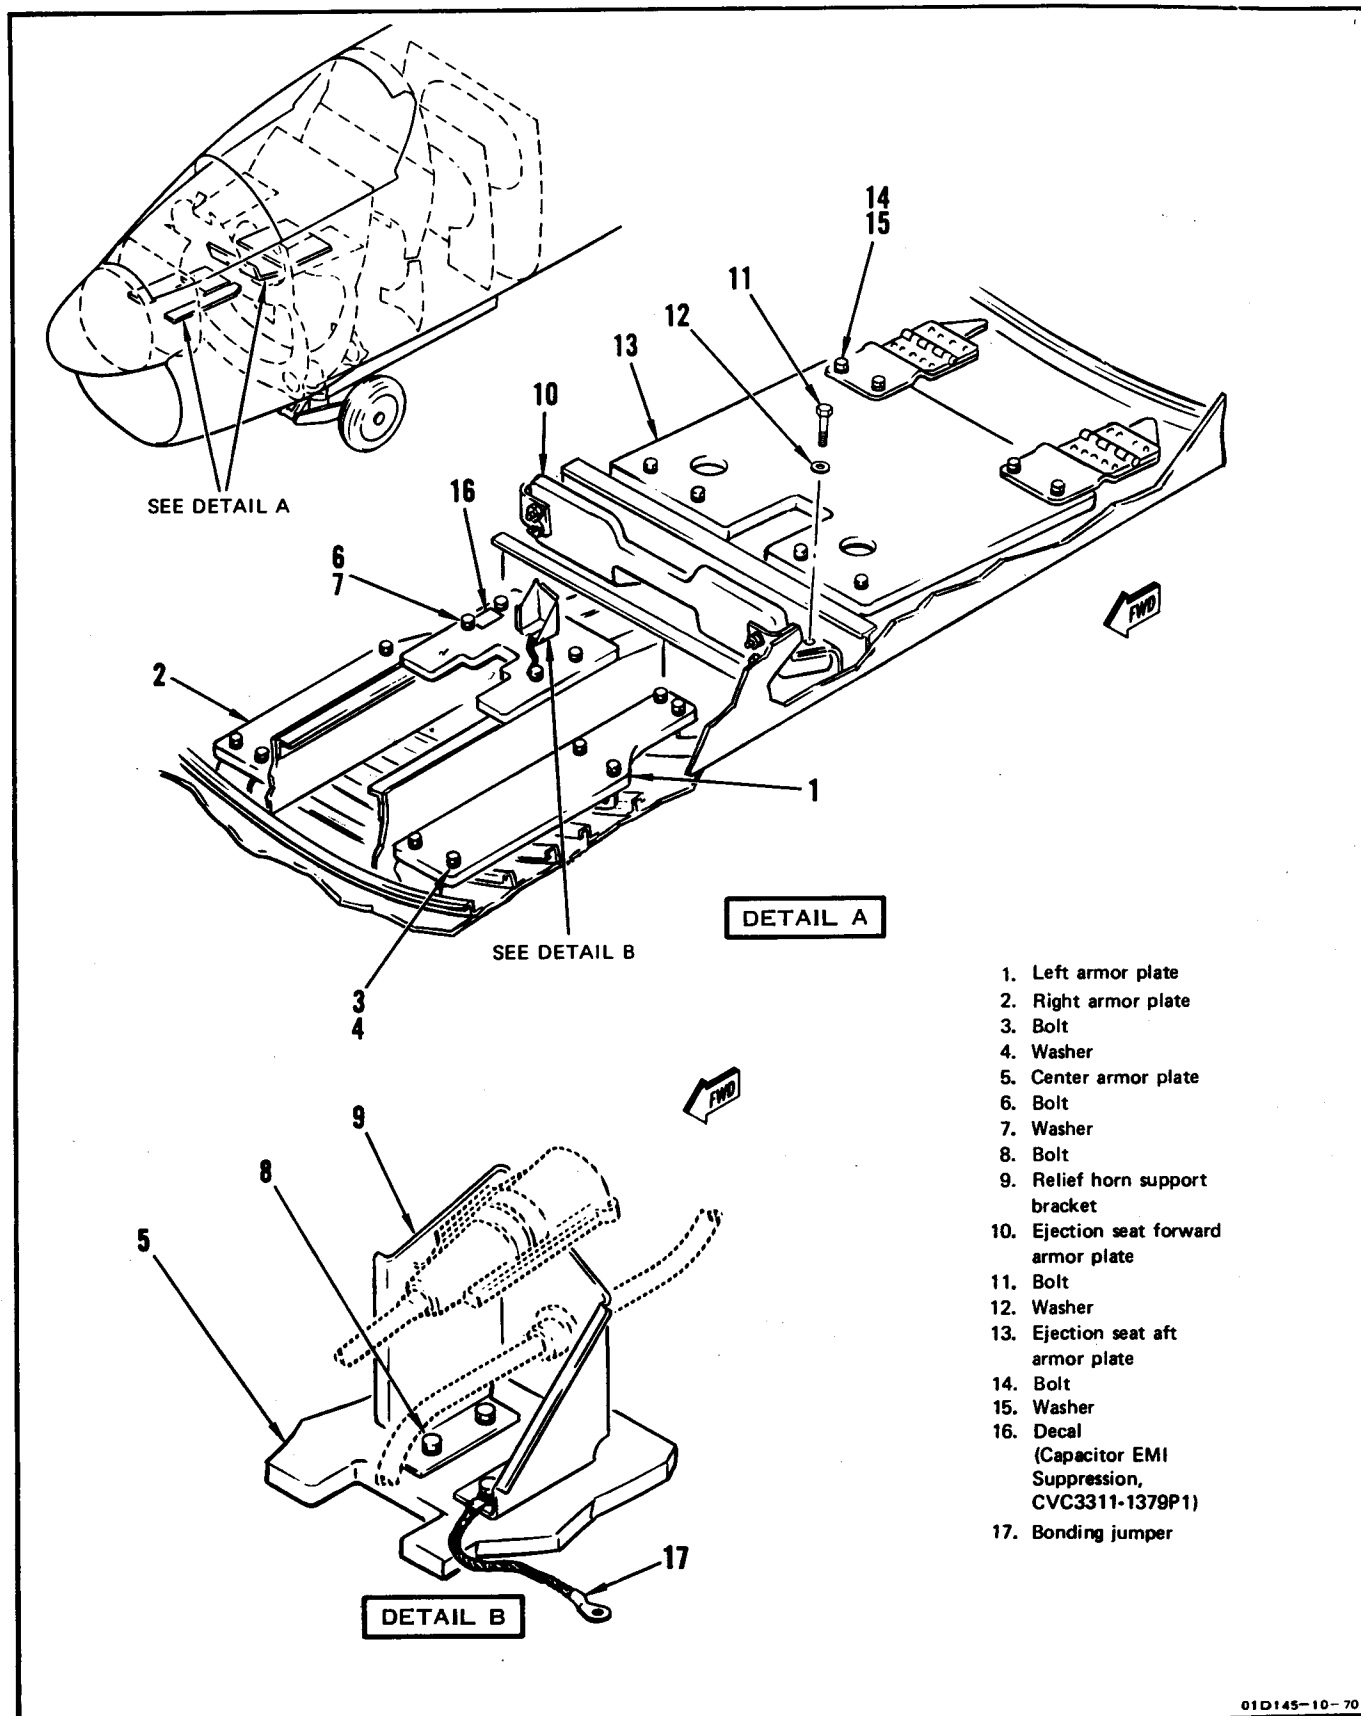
Cockpit Floor Armor Plate Removal and Installation
